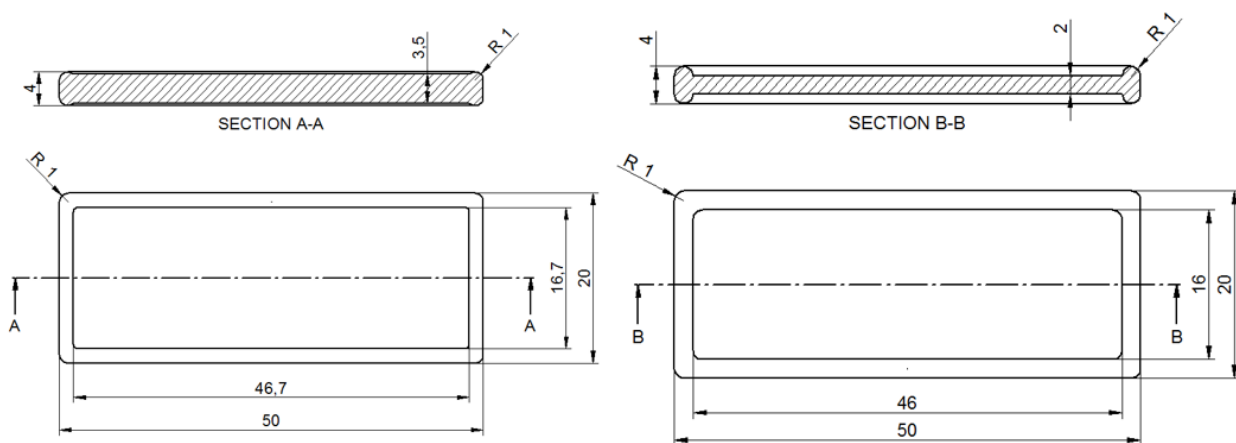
Drawings of the rectangular parts used to determine the optimal distance a cooling channel needs to be positioned from a cavity surface.
